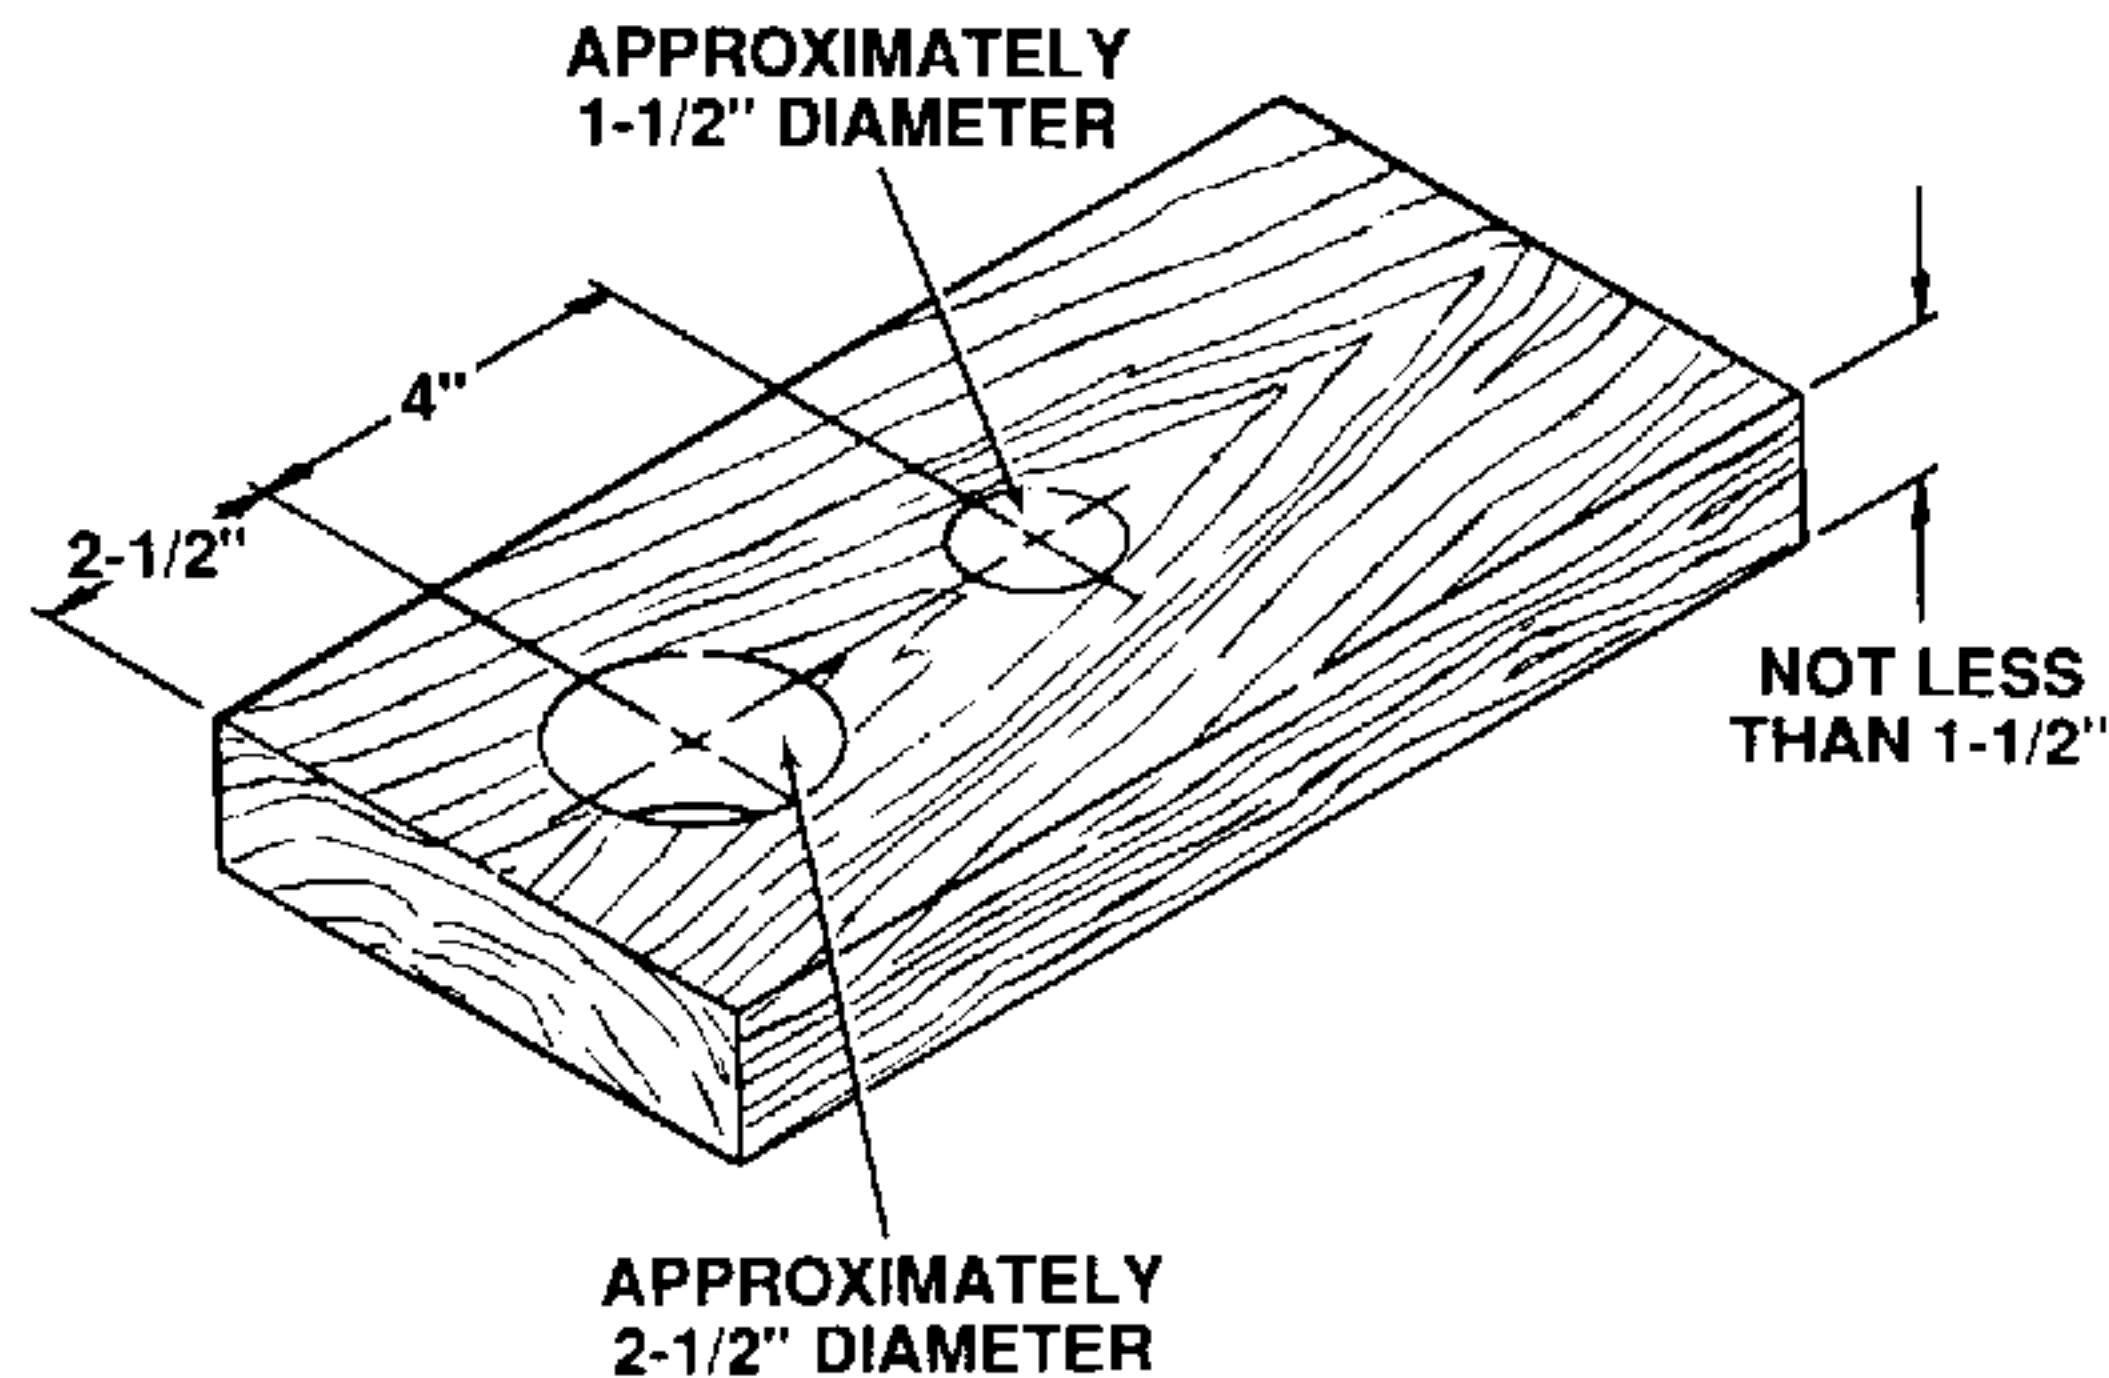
Holding Fixture, Hydrostatic Transmission.
